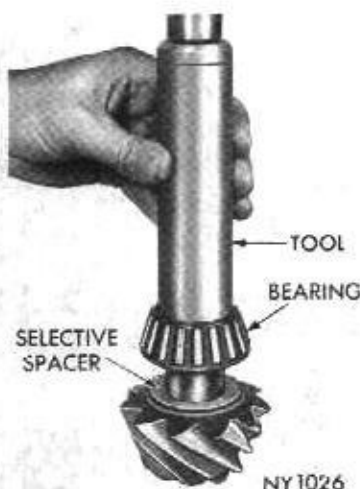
Installing Pinion Shim and Rear Bearing Cone
